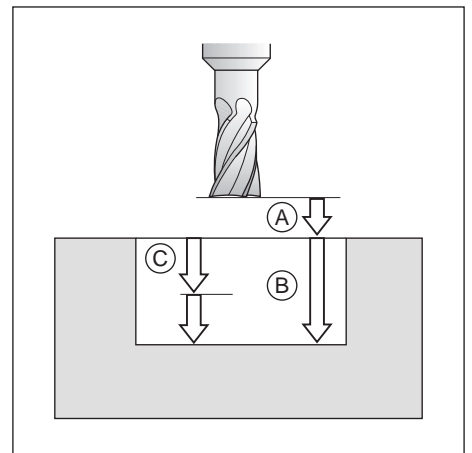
Infeds and distances for the POCKET MILLING cycle
